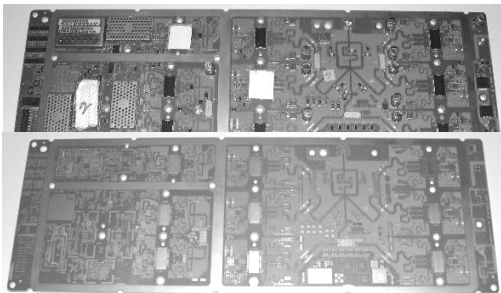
(a) Photos for an assembly board showing PA components (top), and a bare board showing embedded coins (bottom).
